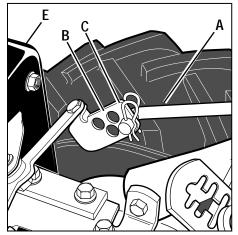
Disconnect Forward Clutch Rod and move forward drive belt out of groove in engine forward drive pulley
